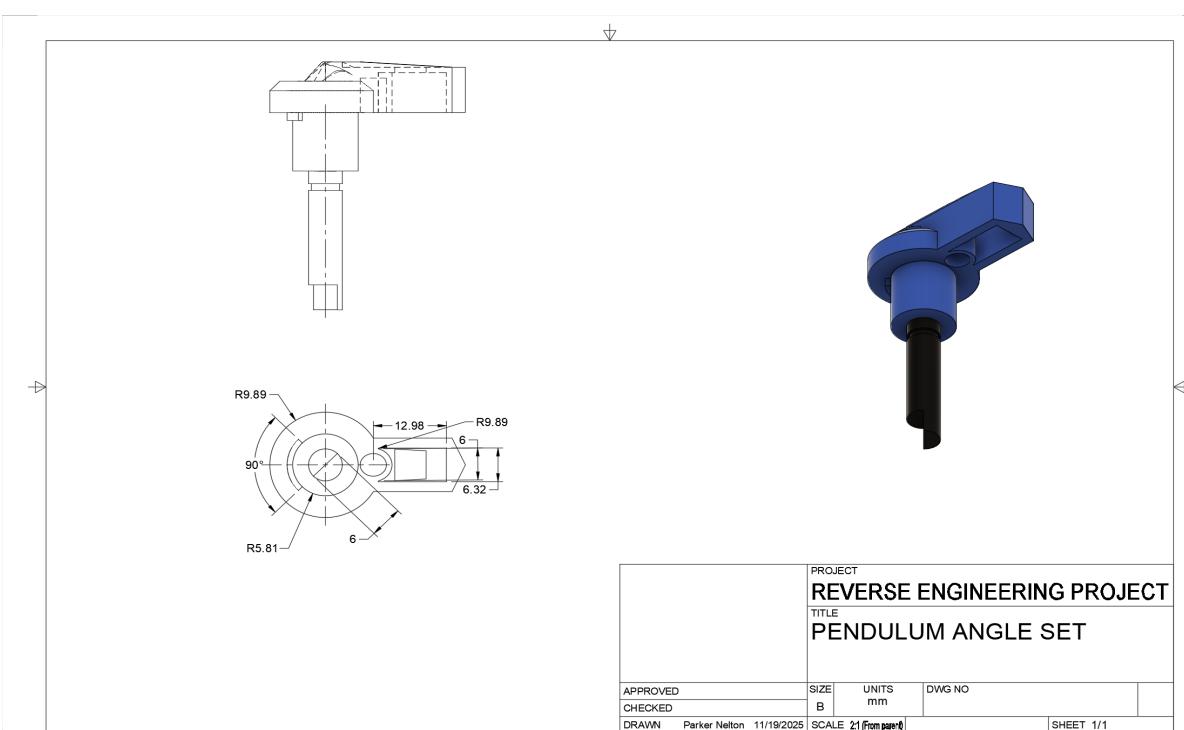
Bottom View of Pendulum Angle Switch Drawing
